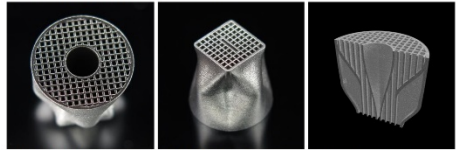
bottom view Figure 2: inclined top view Figure 3: section view (CAD)
